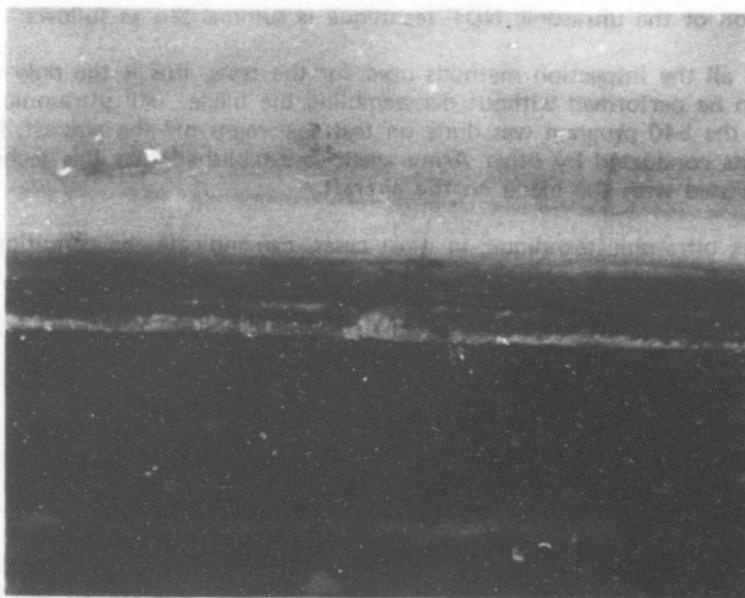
Crack existing on the bondline excess adhesive viewed through a borescope.
